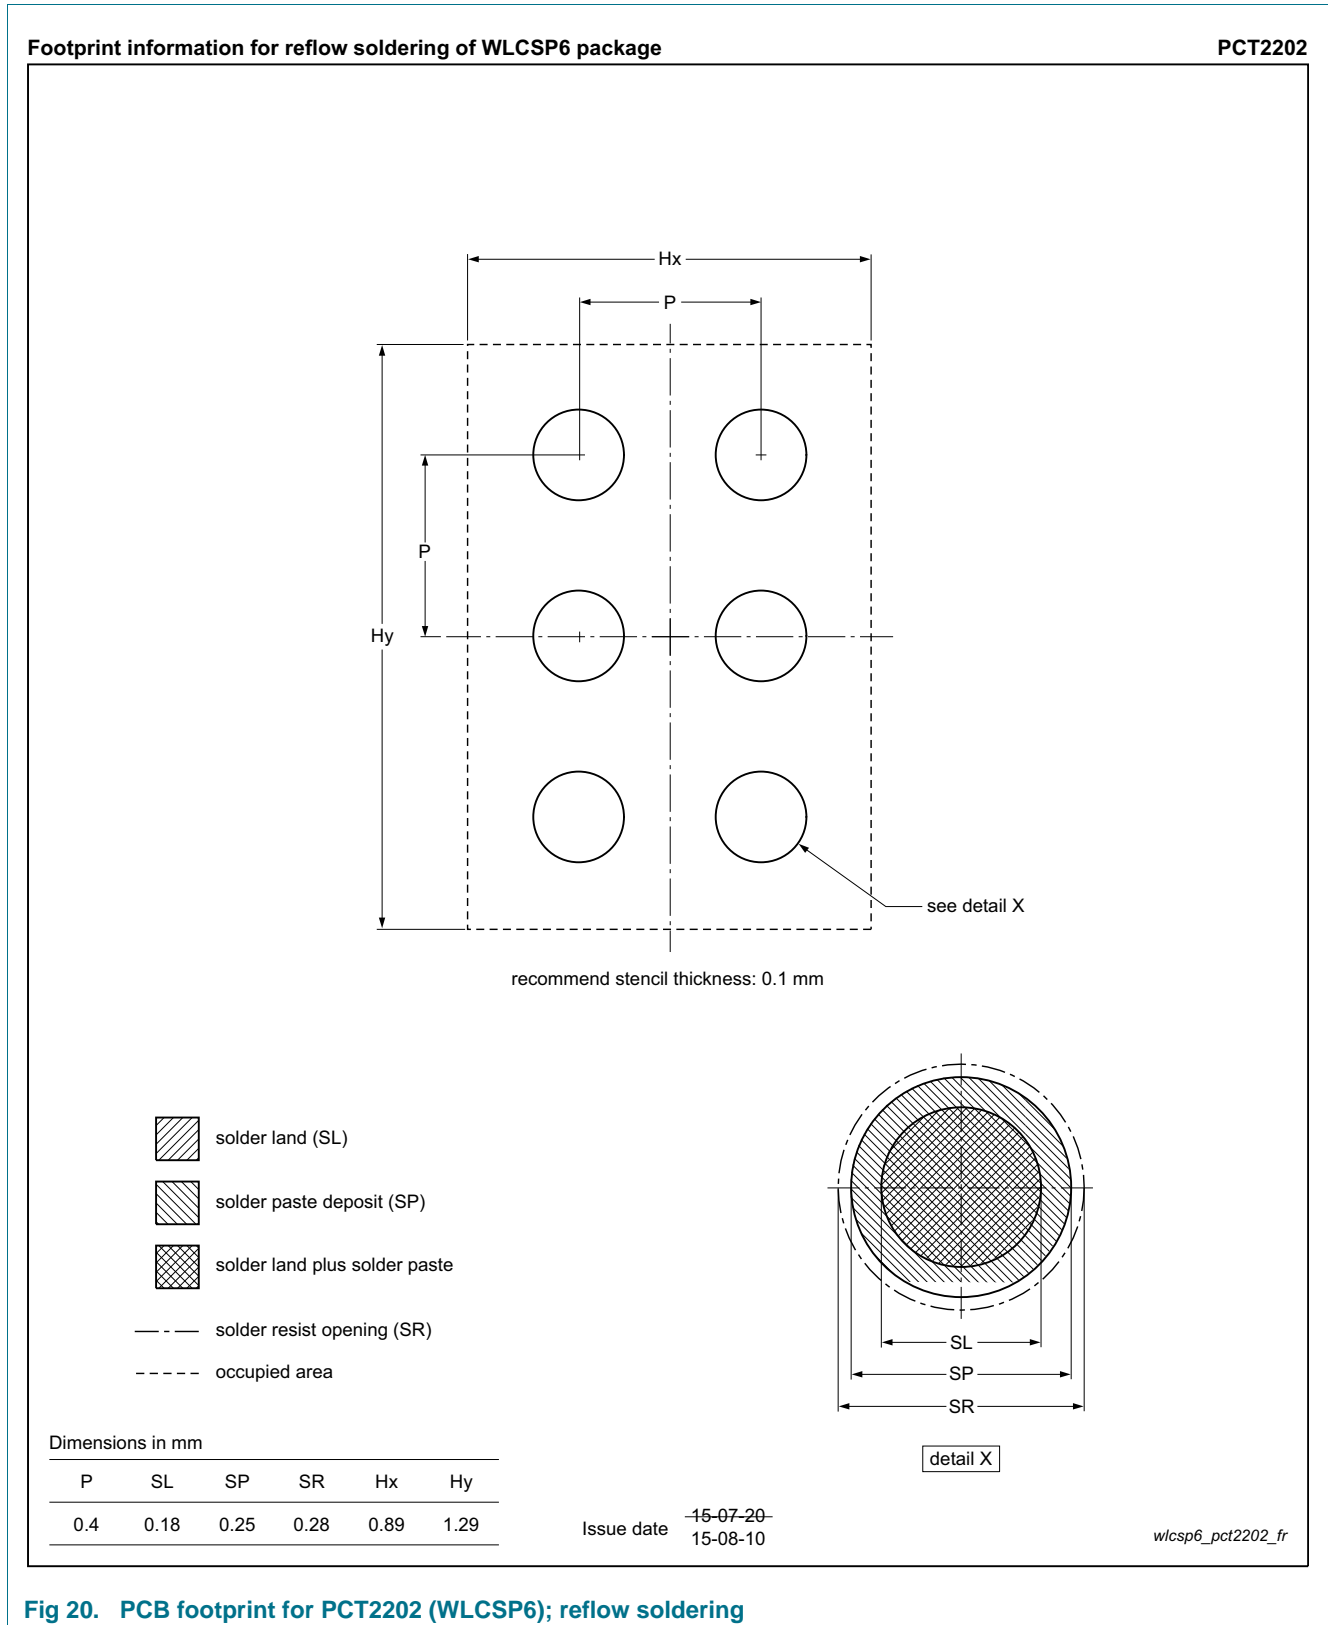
PCB footprint for PCT2202 (WLCSP6); reflow soldering
